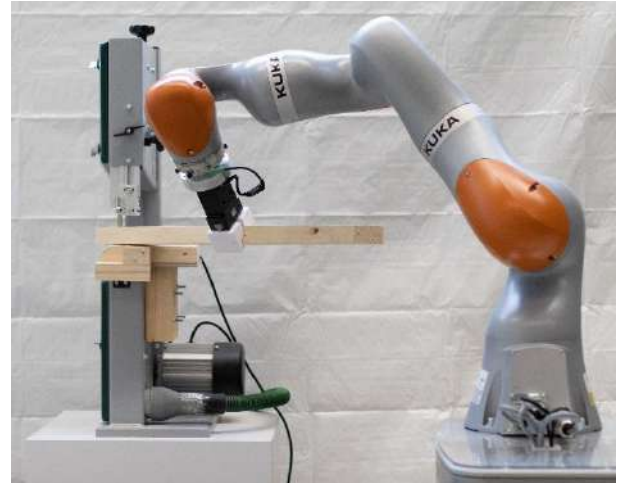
Resting the workpiece on the bandsaw table using the robot during fabrication
